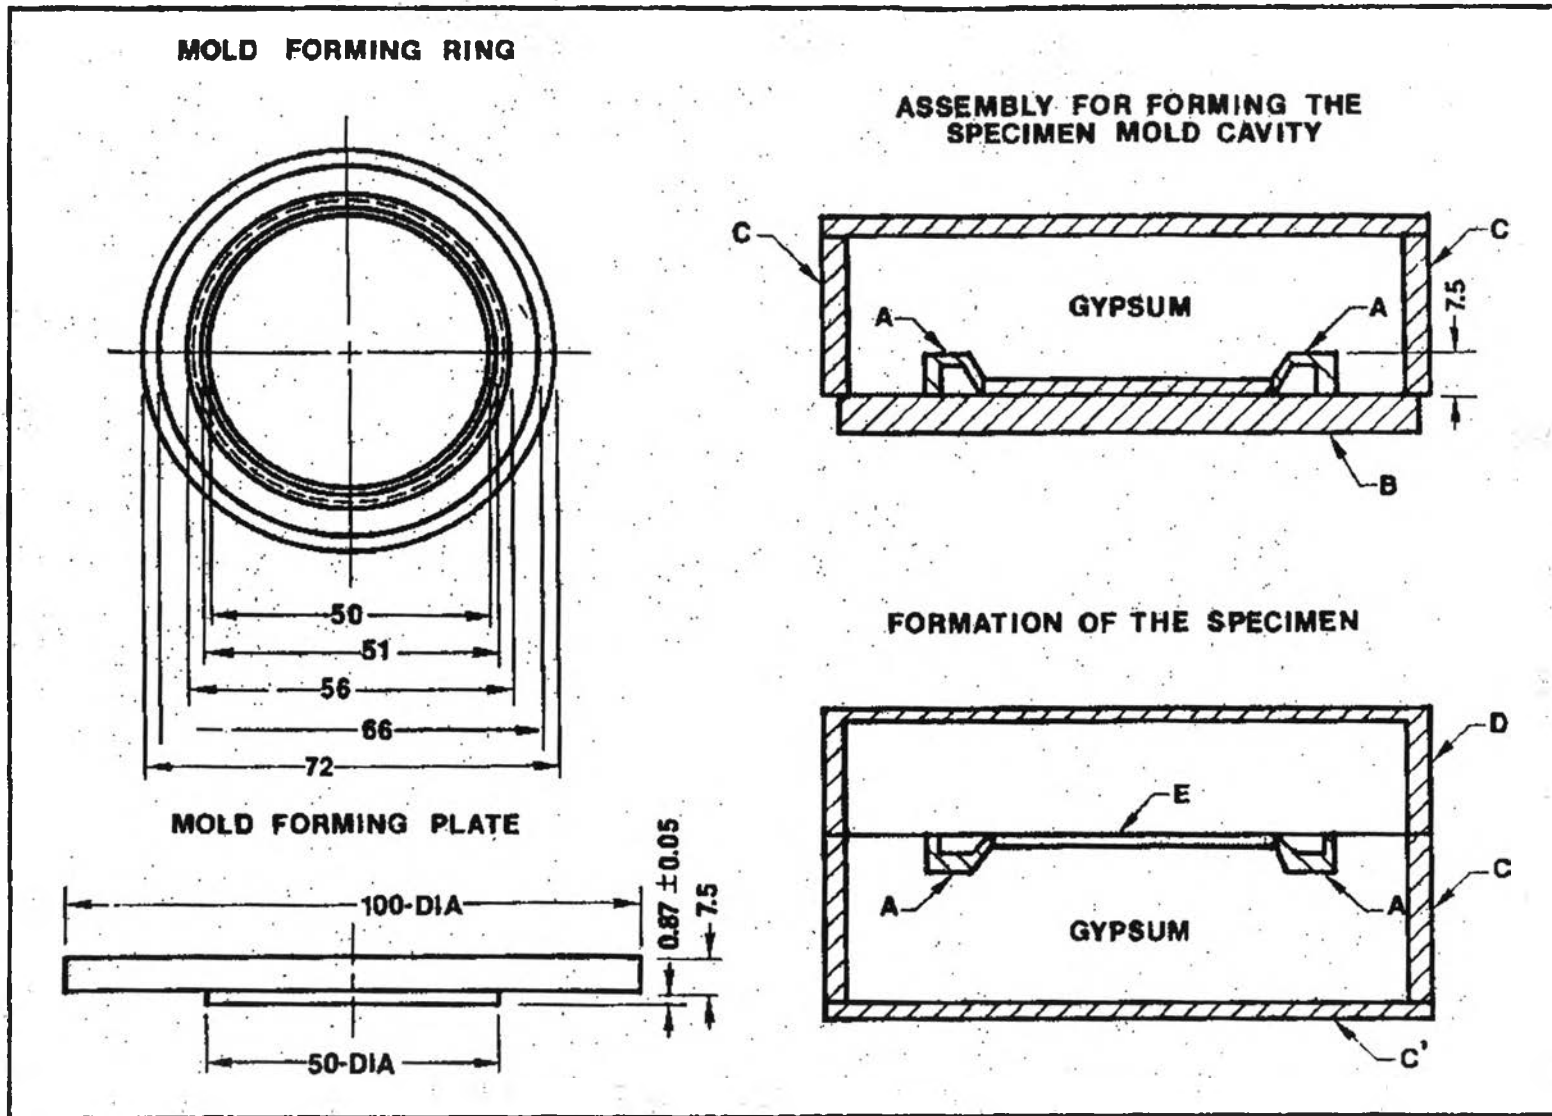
■ System for forming sorption-solubility disks from heat-processed resins. A, mold forming ring; B, mold forming plate; C, upper half of denture flask; D, lower half of denture flask; E, specimen. Mold forming ring and plate of stainless steel. All dimensions in millimeters.
